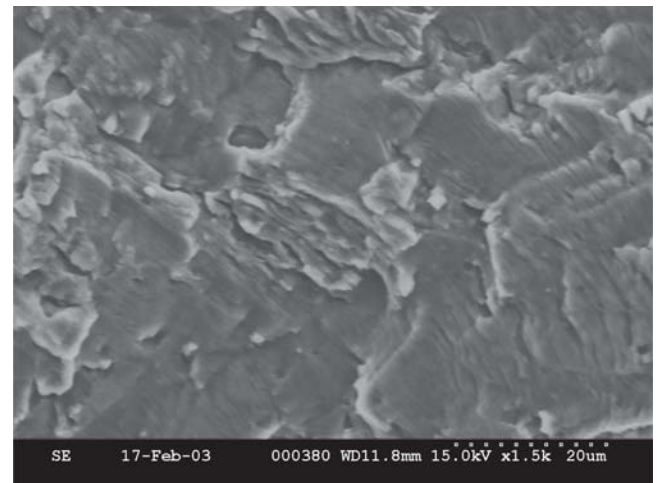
SEM photograph showing striation marks on the fatigue fracture surface
